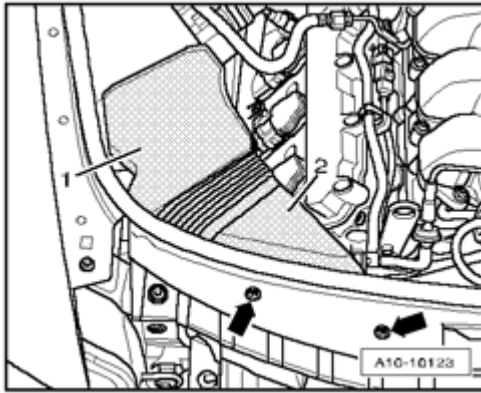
Identifying Engine Bracket-To-Cylinder Head Bolts
